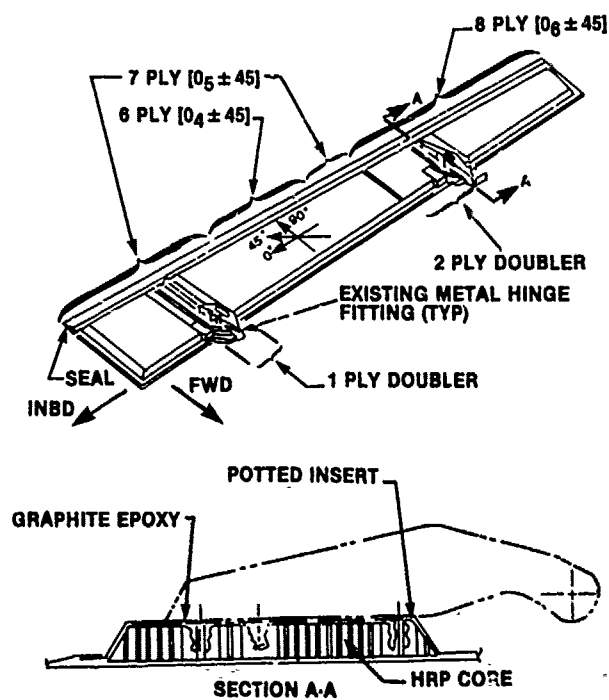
S-3A COMPOSITE SPOILER ASSEMBLY
